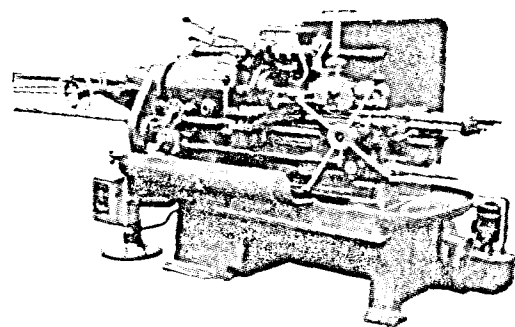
No. 3A Staybolt Capstan Lathe with tooling equipment for machining Firebox Staybolts.
